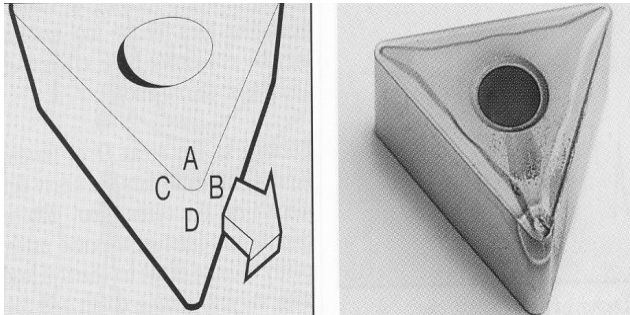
Wear zones on the cutting tool caused by chip formation [3]
